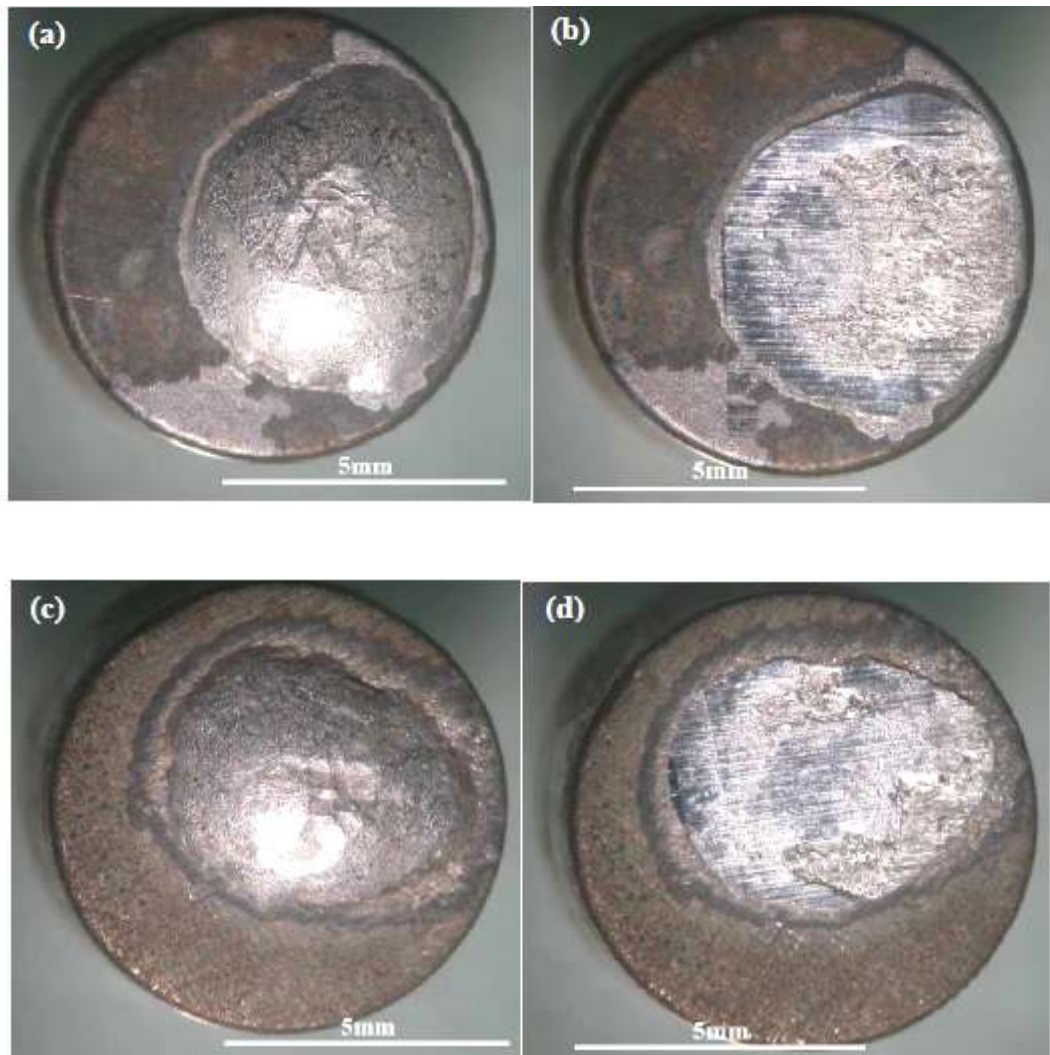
Macroscopic images (top view) of stabilized Sn-0.3Ag-0.7Cu solder on (a) smooth Fe-Ni surface (c) rough Fe-Ni surface. Macroscopic images (top view) of sheared Sn-0.3Ag-0.7Cu solder on (b) smooth Fe-Ni surface (d) rough Fe-Ni surface
